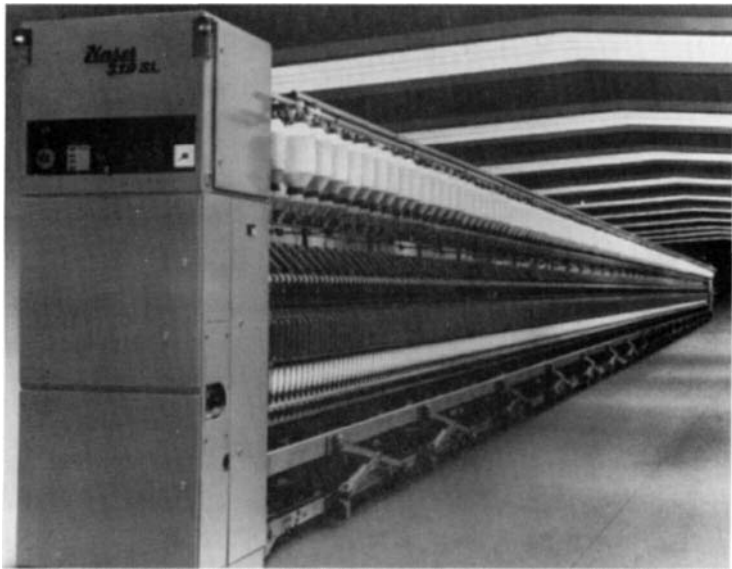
Tangential belt drive of a textile machine. (*Siebling.*)
